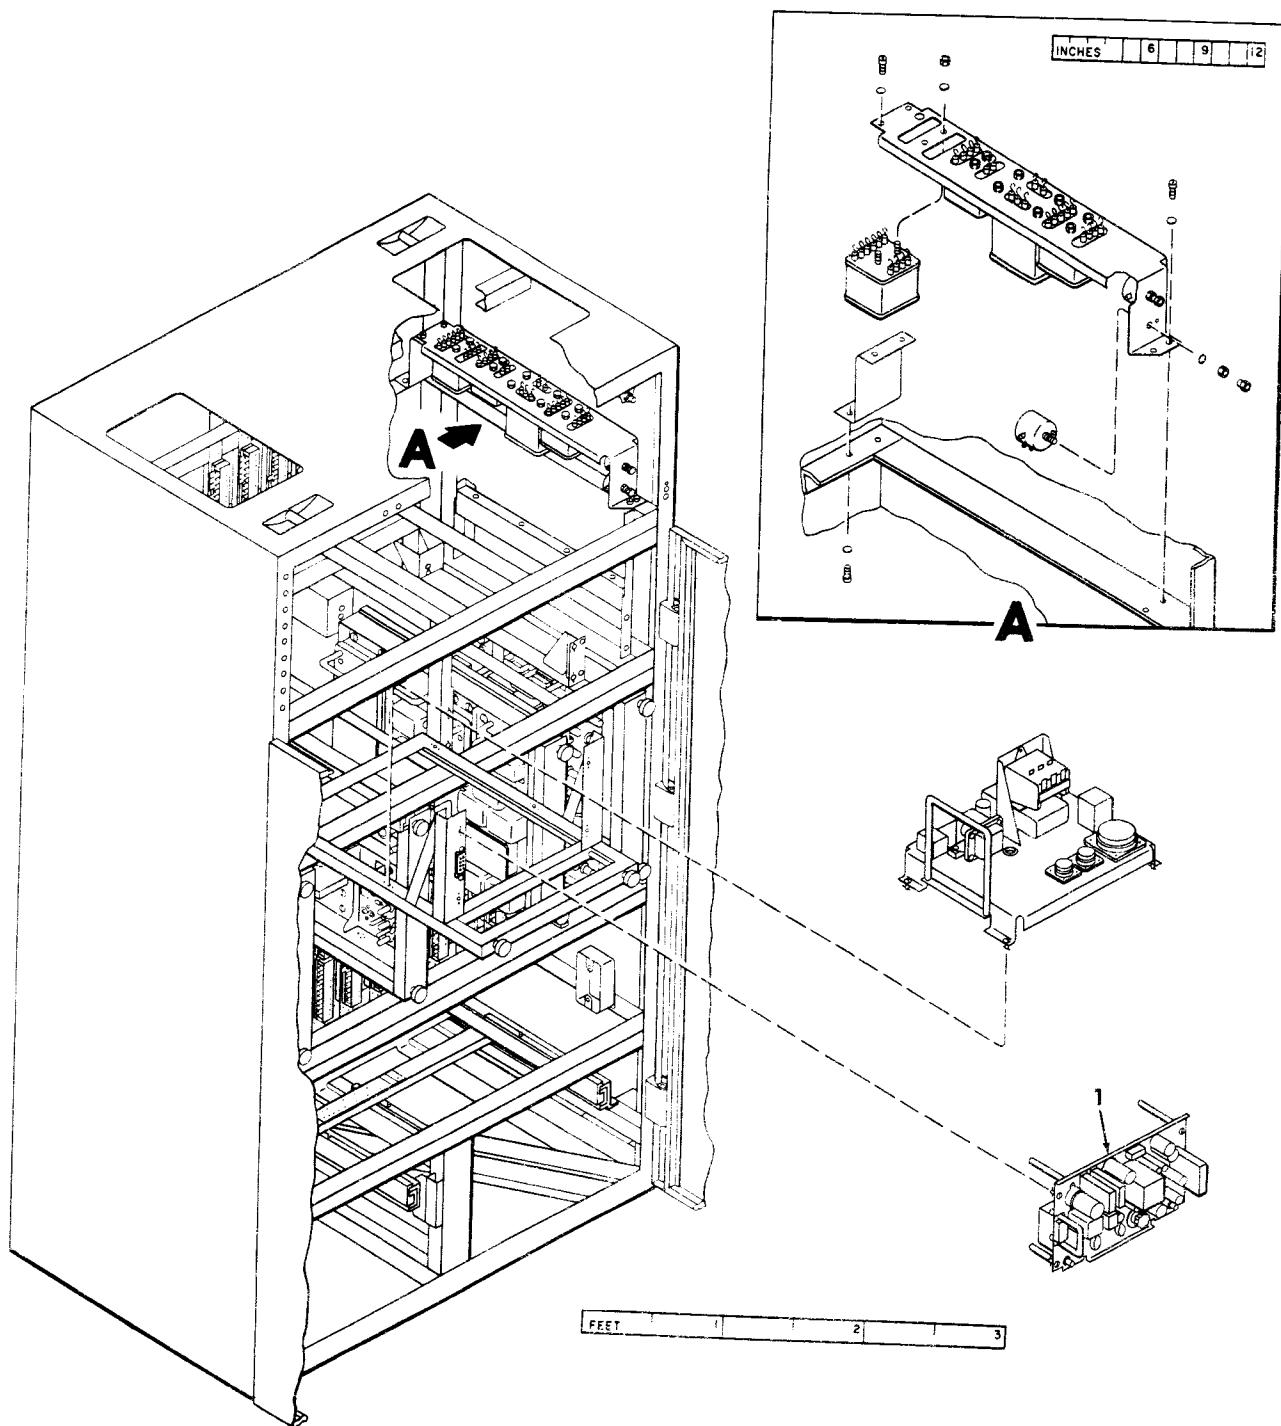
Control, receiver-transmitter (9141310)—partial exploded view
